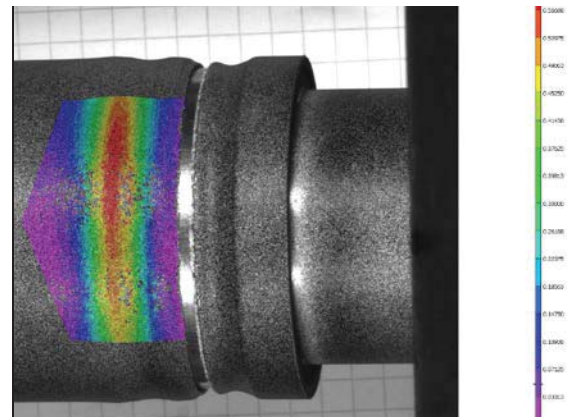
The tube is pulled out of the first groove (without thickness reduction or fracture)
